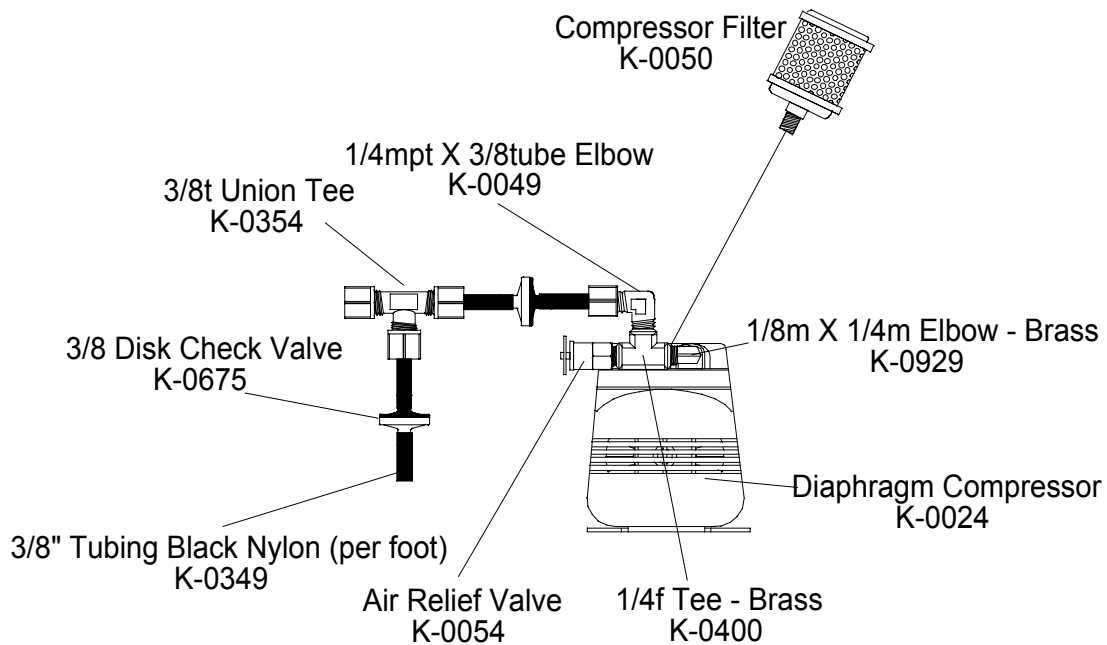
TRAC MASTER TMD Compressor Assembly
